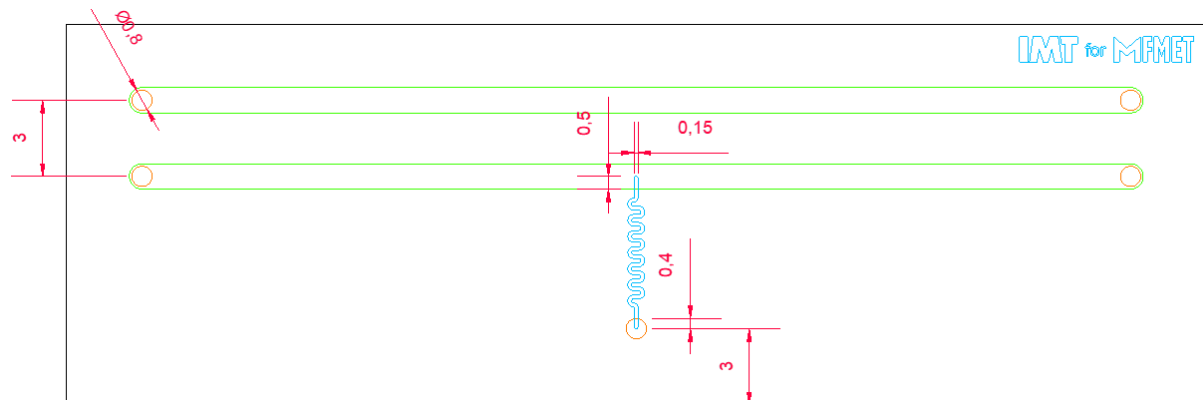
Technical drawing of design 07 (length of leakage channel = 10 mm).
